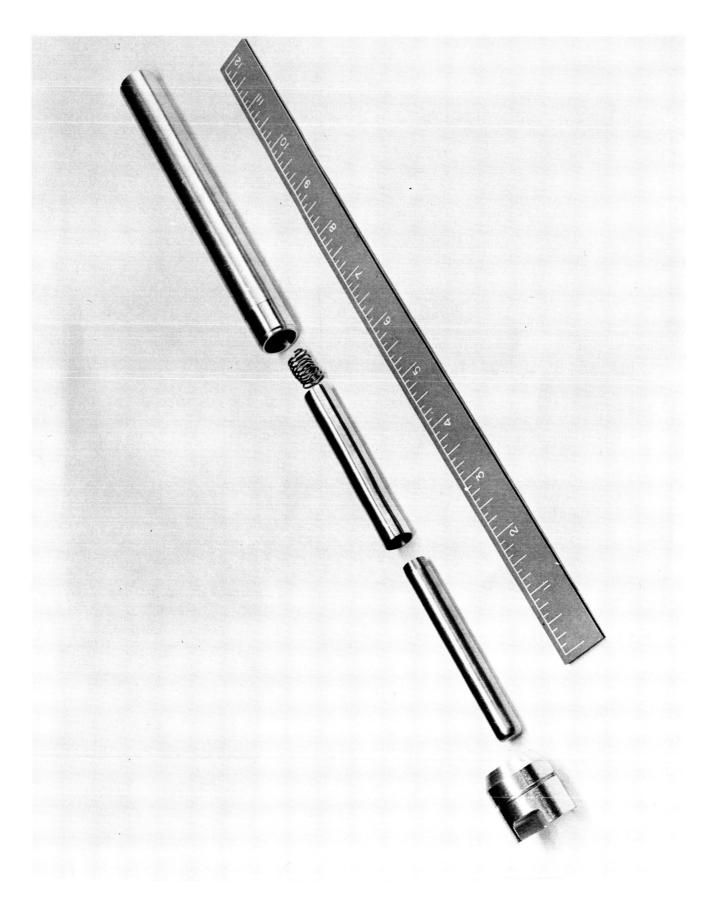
EXPLODED VIEW OF THE CAPSULE ASSEMBLY
